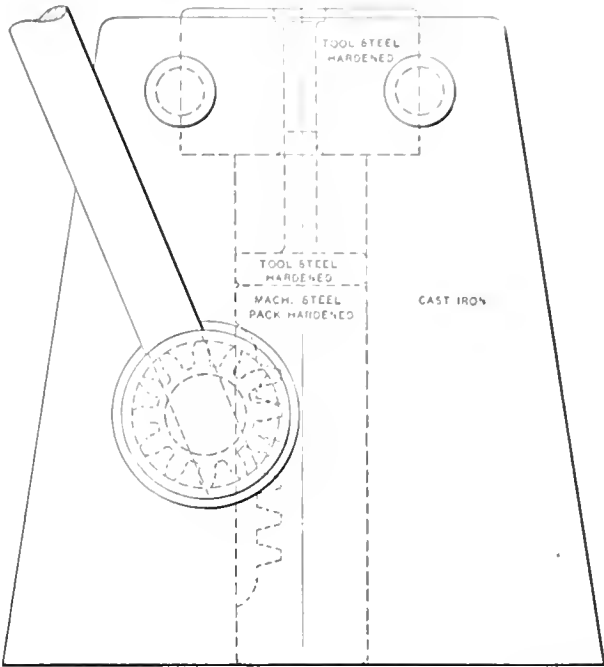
Fixture used in Stamping Oval Bottom Sets
